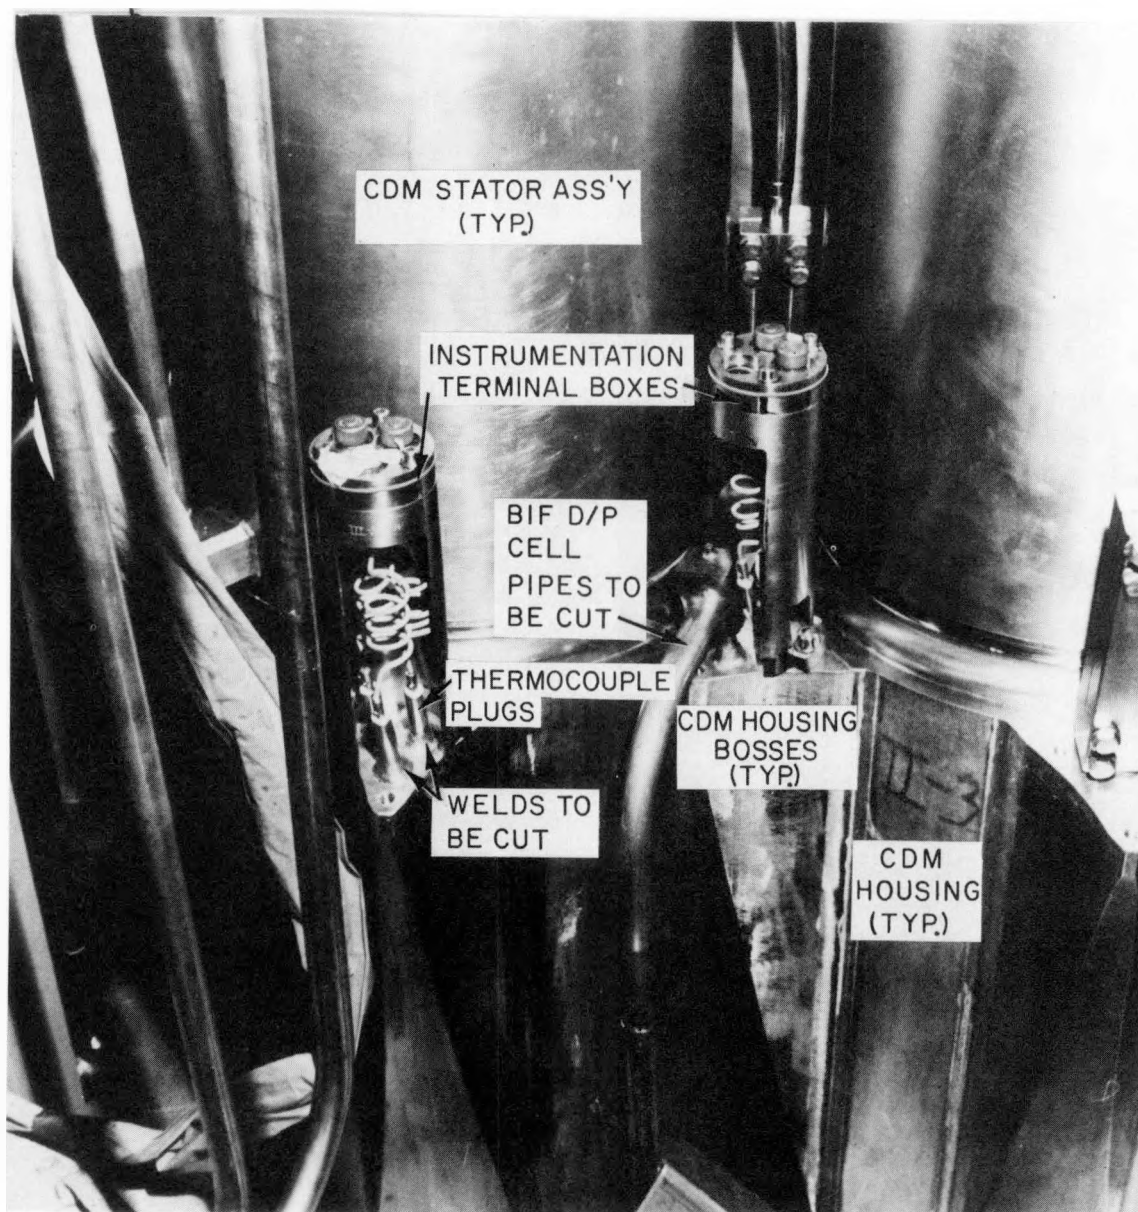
Instrumentation Terminal Boxes on CDM Housing Bosses Showing Thermocouple Instrumentation and BIF Pressure Tap Plug Welds
